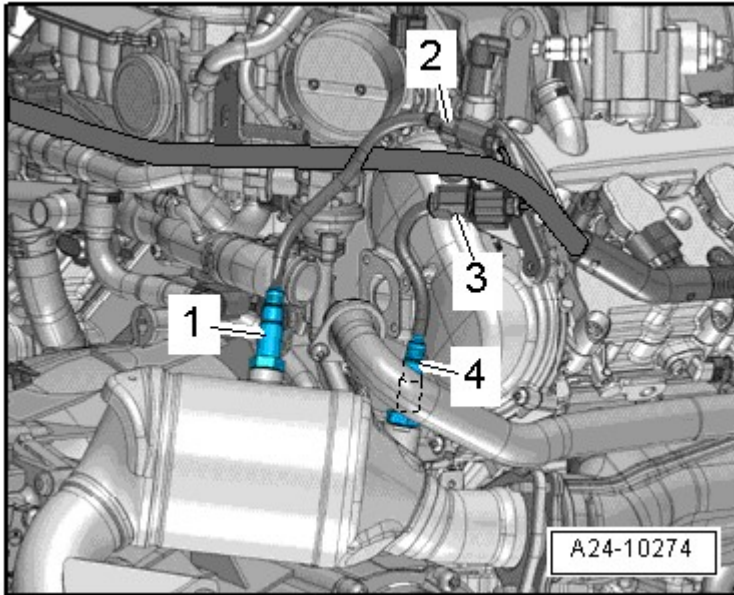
Identifying Oxygen Sensor Electrical Connectors
